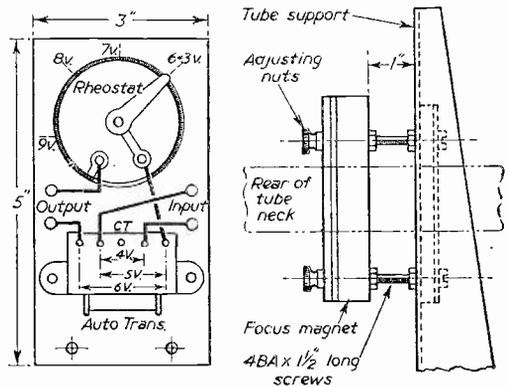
(left).—Details of a brightener, and Fig. 3 (right).—the focus assembly.
